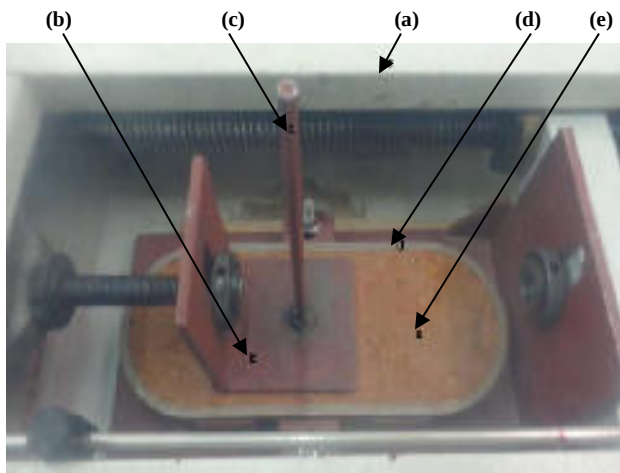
SMAT Tool Assembled in Tensometer and under Operation
